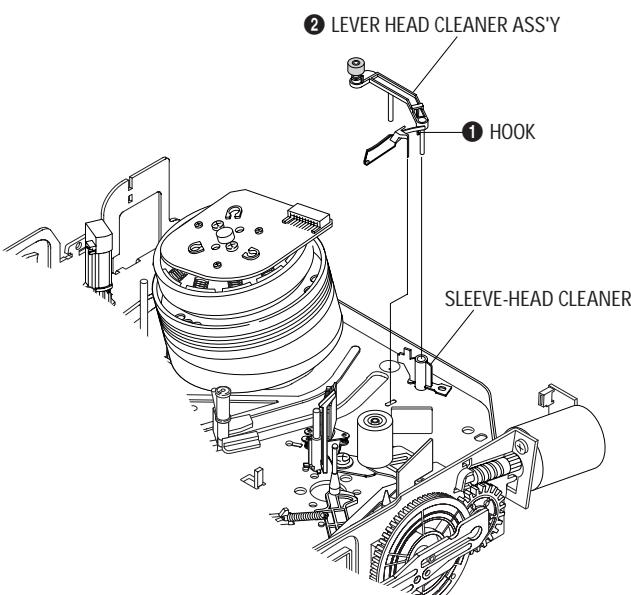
Lever Head Cleaner Ass'y Removal
